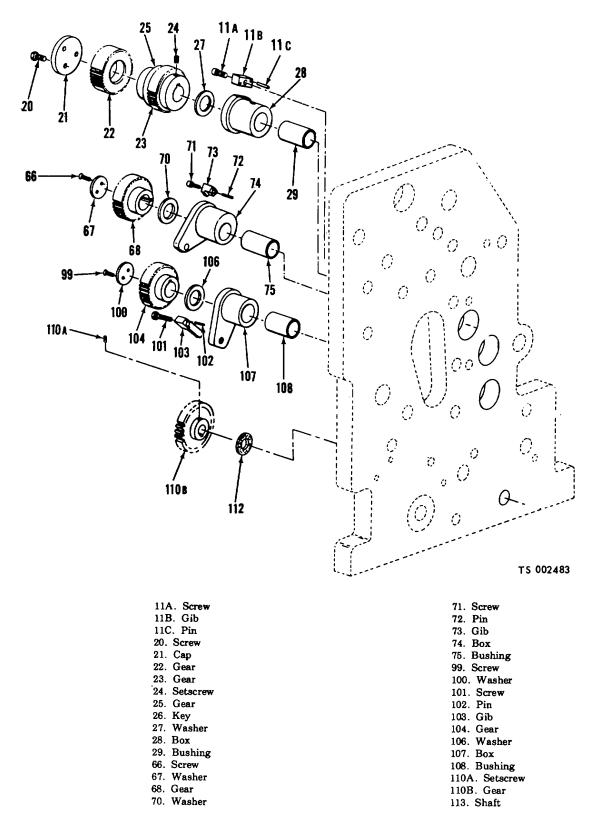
Cylinder and main drive assembly (Sheet 2 of 5).
